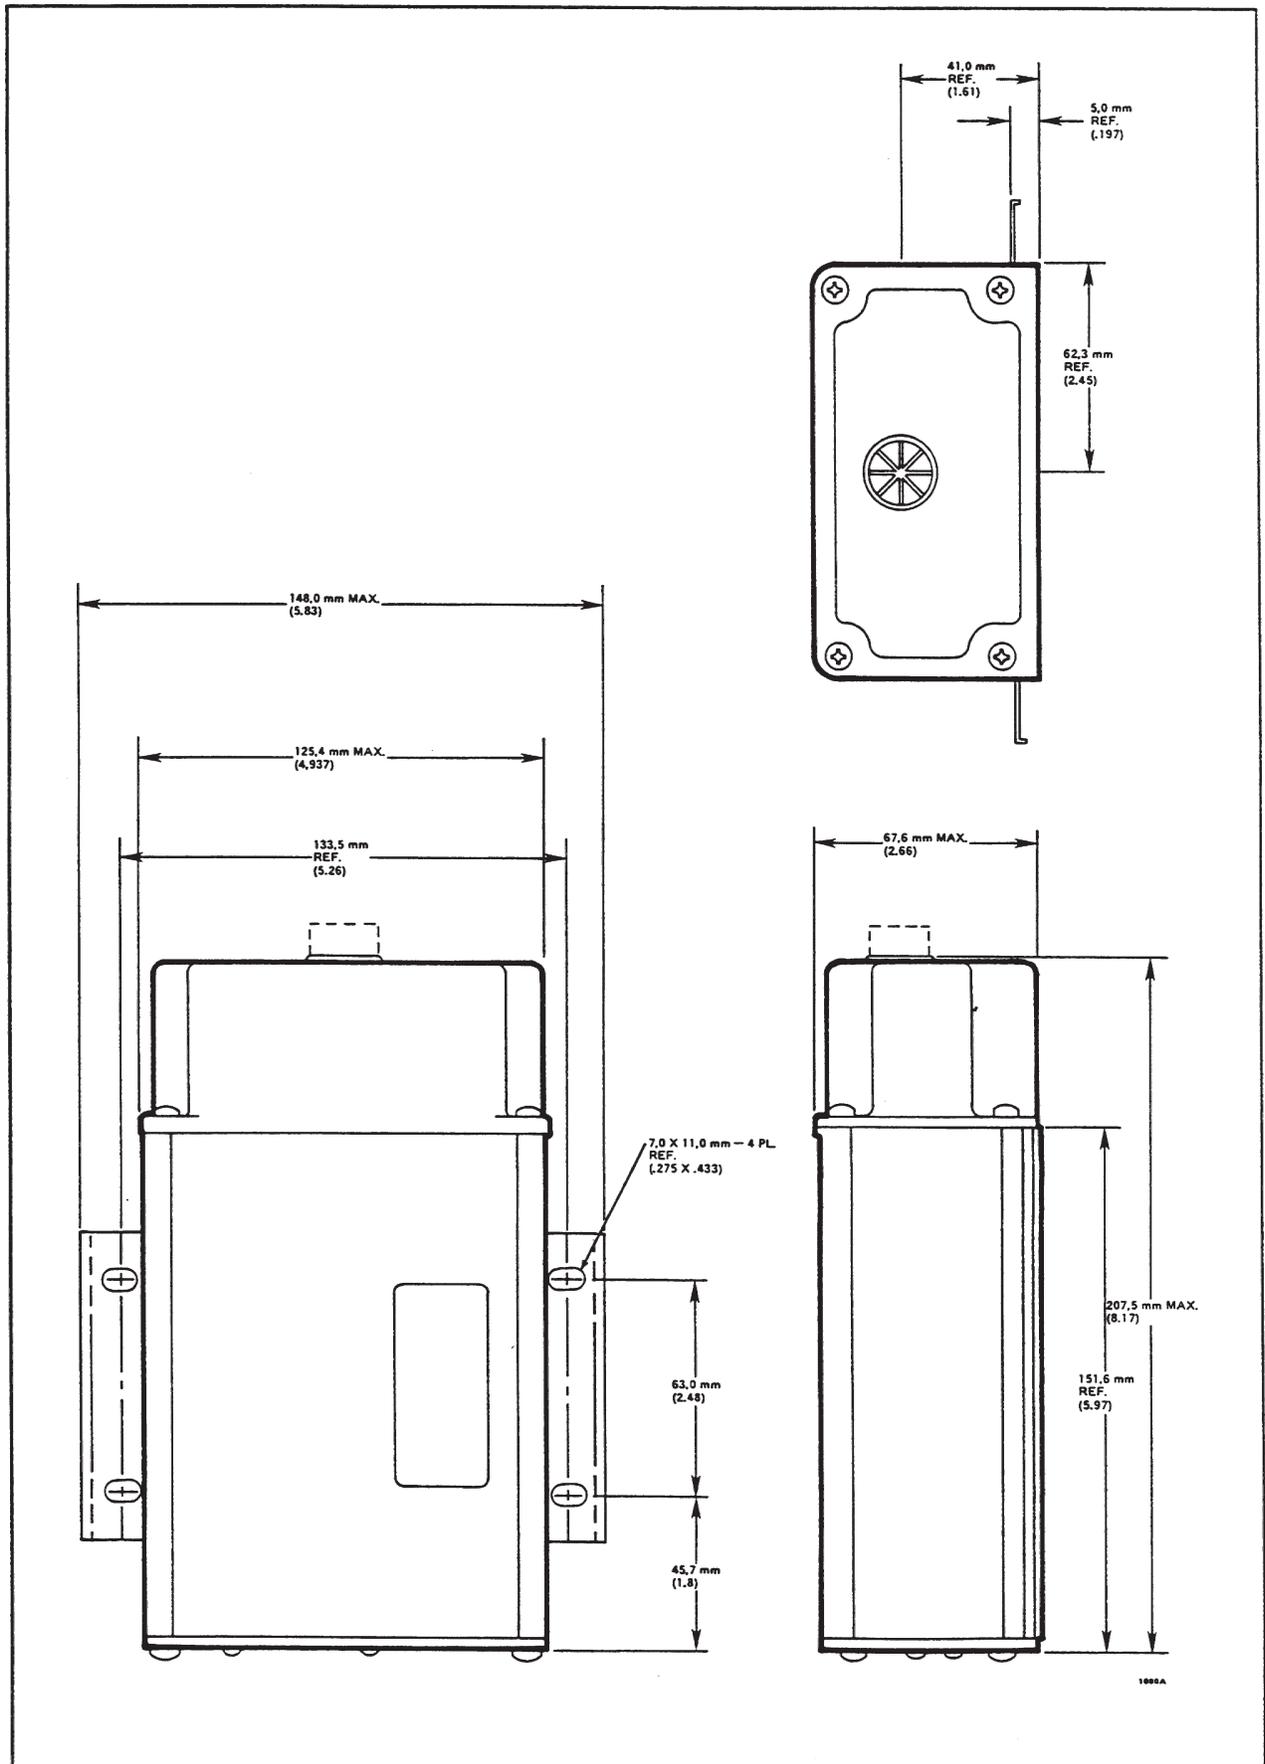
Dimensions of the MCE100A, B in millimeters (inches).
